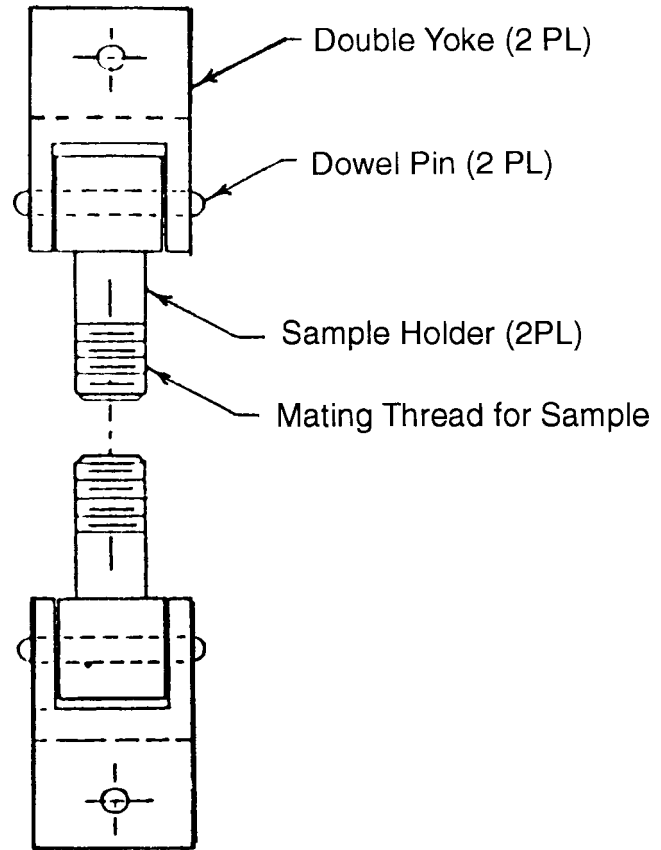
Adaptor to Mate the Gripping Device to the Tensile Machine
